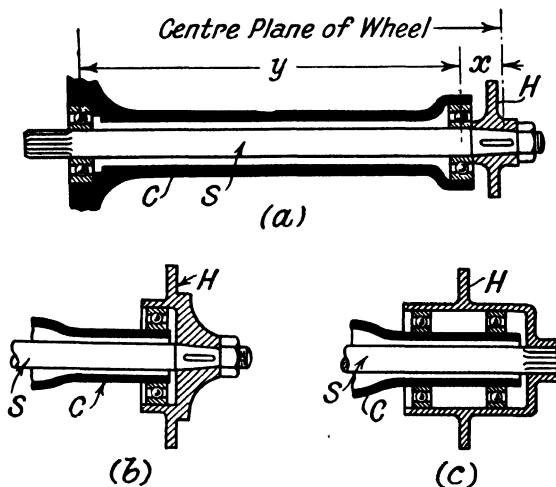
THREE TYPES OF REAR-AXLE LAY-OUT
